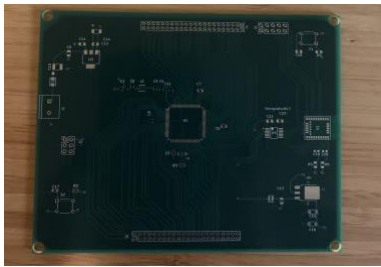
The first version of the printed circuit board. This shows a blank copy of the first board to show the systems used.
